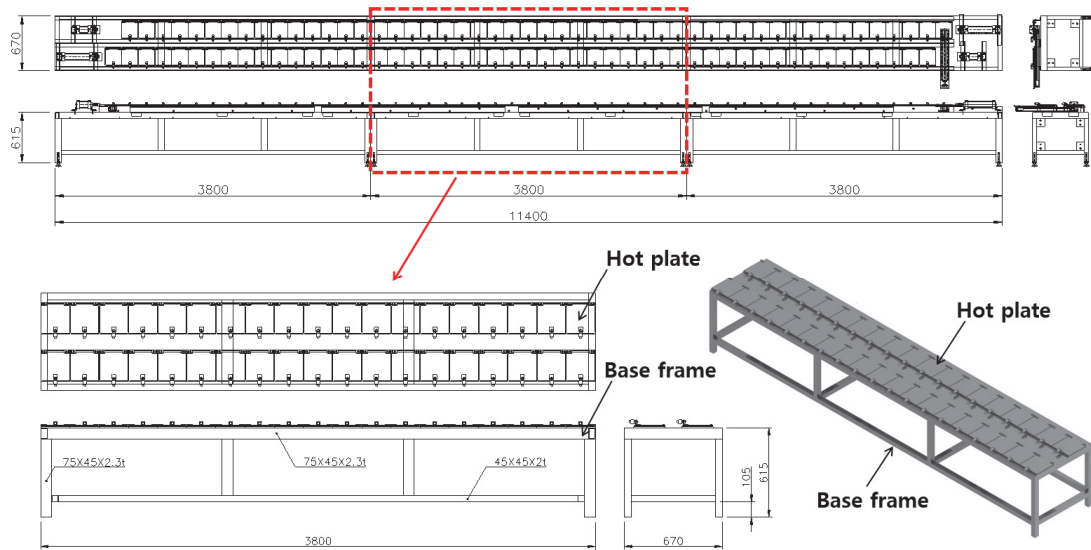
Drawing on structural analysis of Base frame and Hot plate of conveyor system
